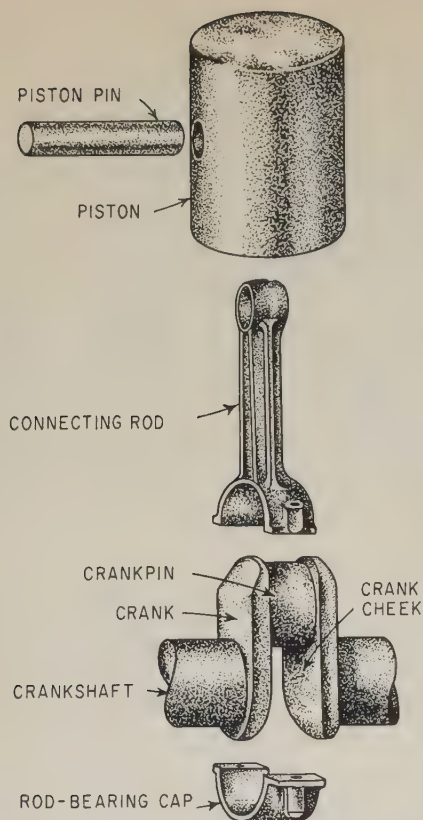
Piston, connecting rod, piston pin, and crankpin on an engine crankshaft in disassembled view. The piston rings are not shown.
